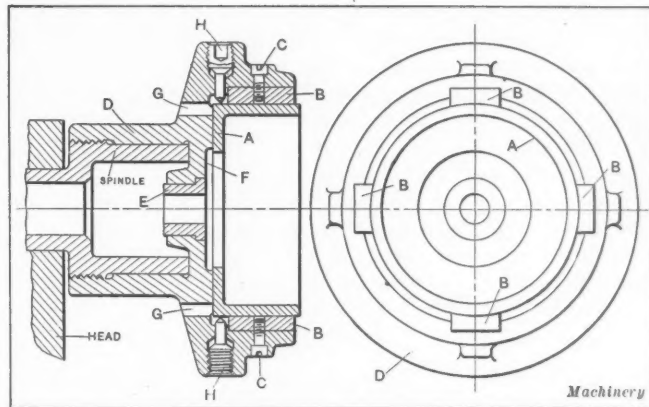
Fixture provided with Interchangeable Jaws for holding Different Sizes of Work
